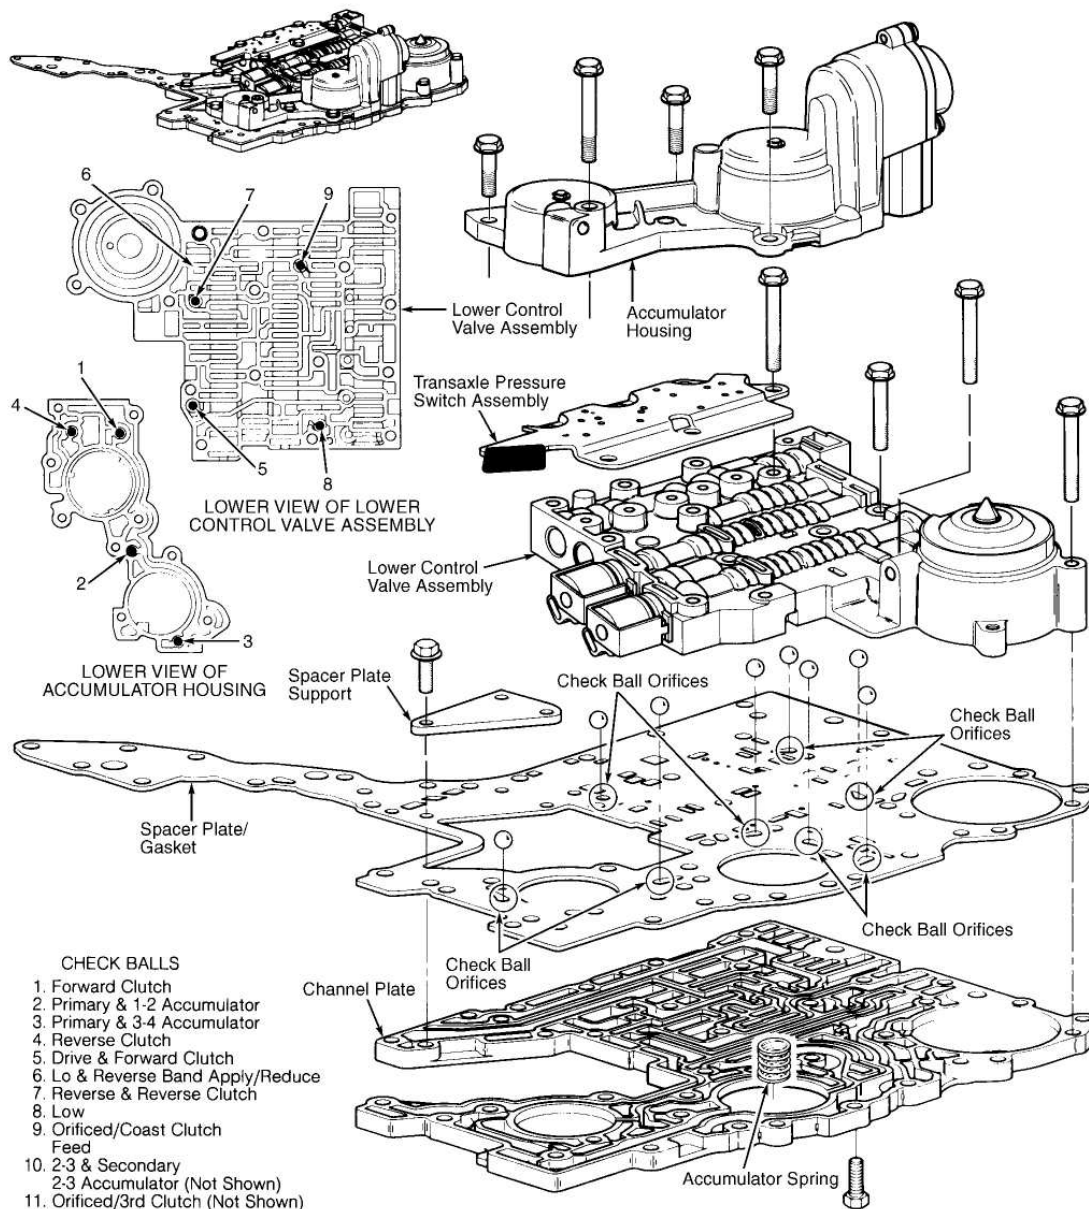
Exploded View Of Lower Channel, Spacer & Valve Body Assembly
